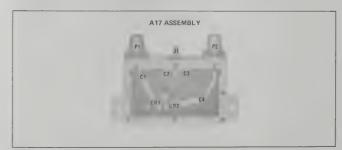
, A17 Phase Modulator Assembly Component Locations
